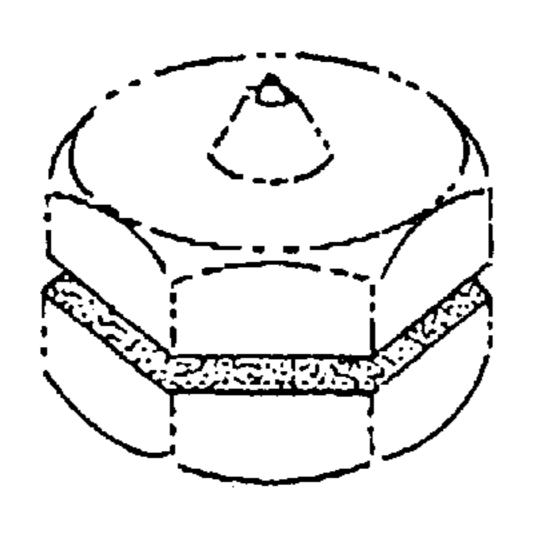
is an elevational view of the sidewall of FIG. 9;
